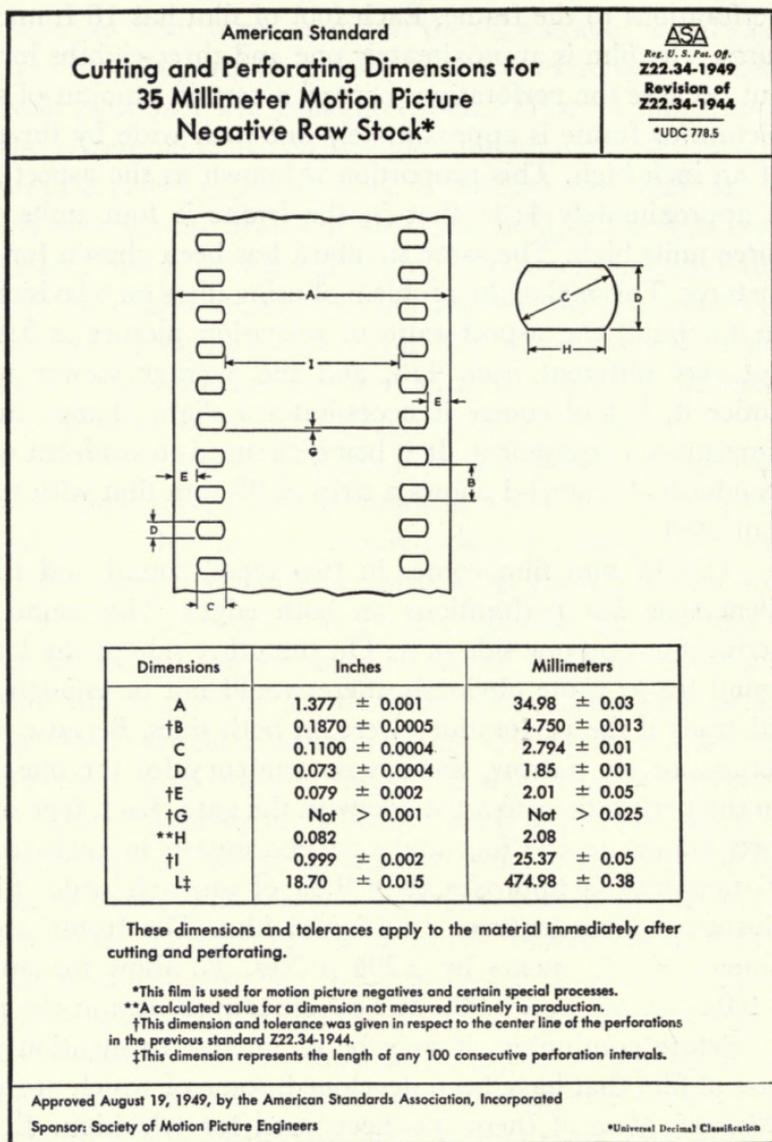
Dimensions and details of 35 mm film stock showing perforations and general appearance. Frame size (camera) 0.868 by 0.631 inches. Projector aperture is 0.825 by 0.600 inches.
